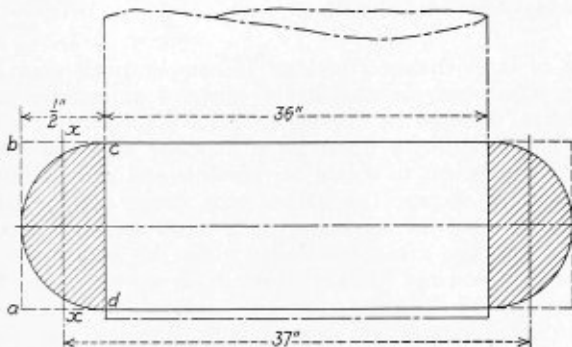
Section of Stack Showing Arrangement of Bead Iron
